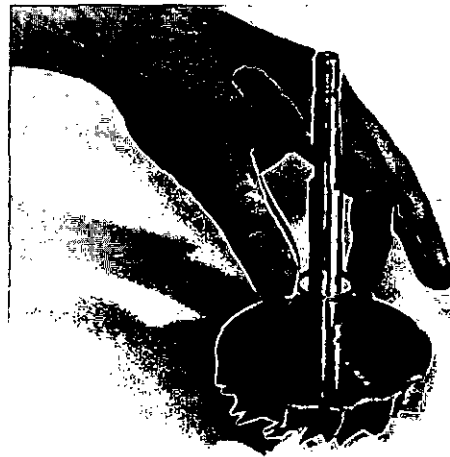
(T3513). Installing the sealing ring onto the turbine wheel shaft
